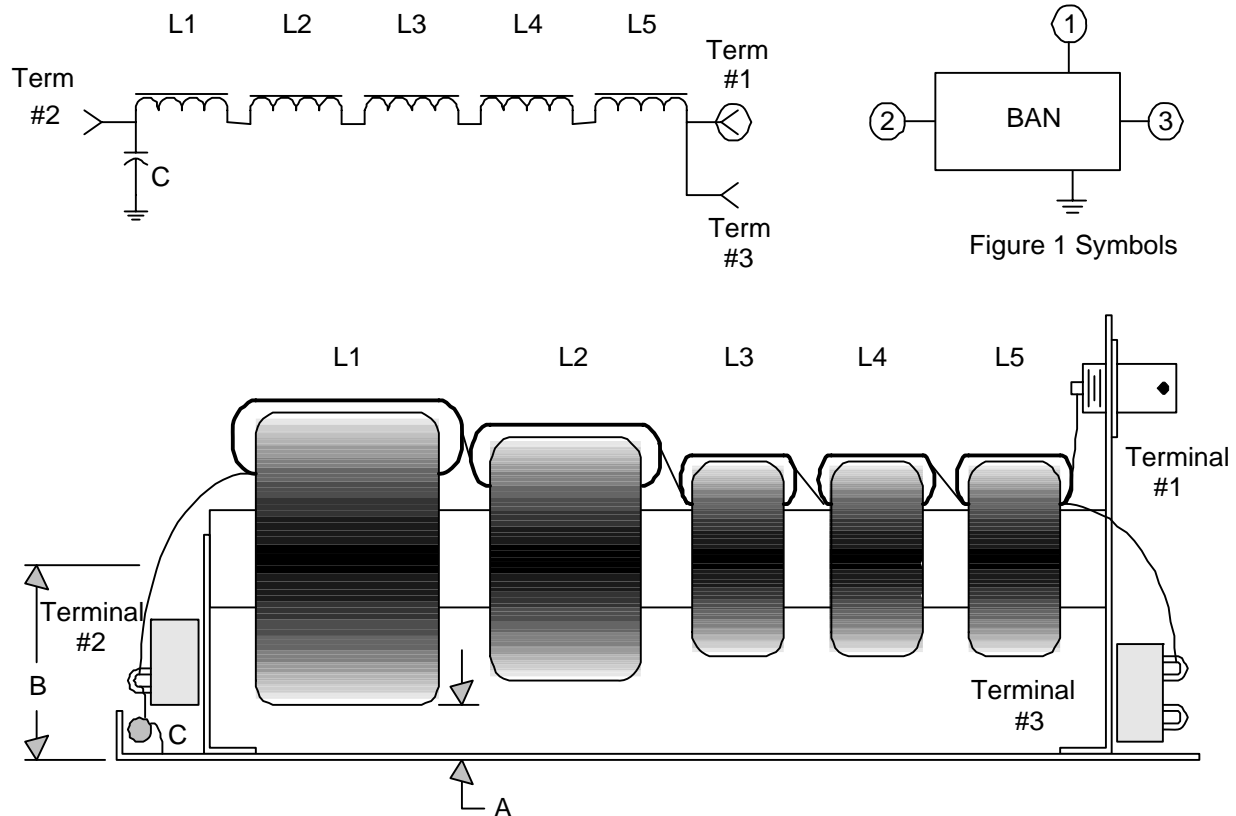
Example Schematic and Assembly Drawing of a BAN (Side View)
